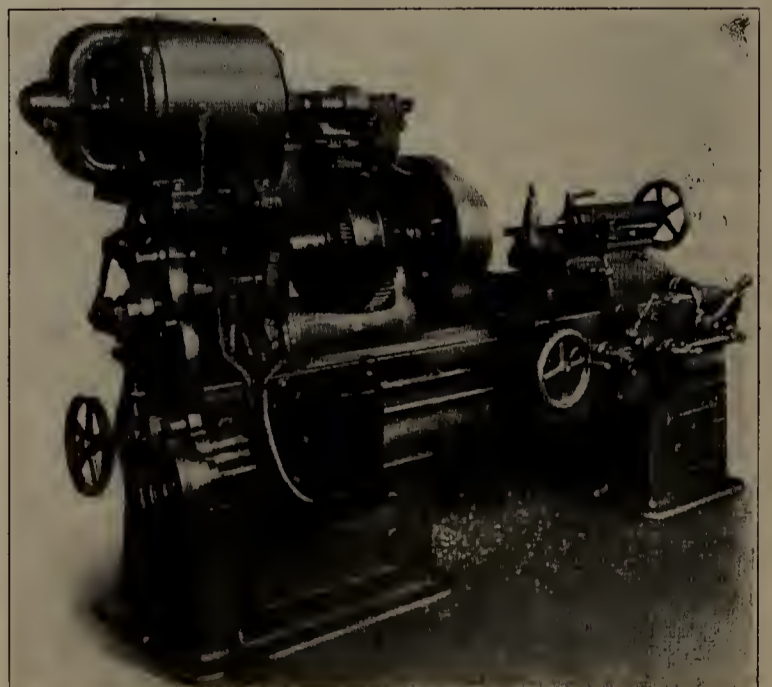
24-in. Lathe with Reversing Gear Motor.
